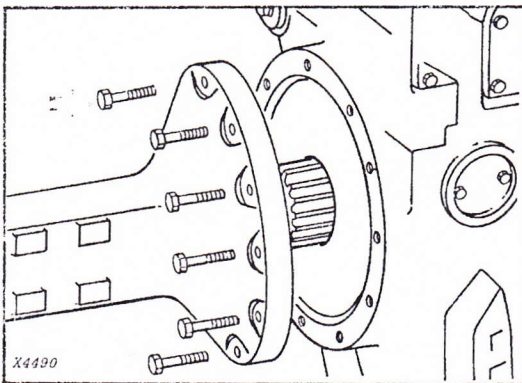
When Fasteners are Removed, the Assemblies Can Be Separated into Individual Components
